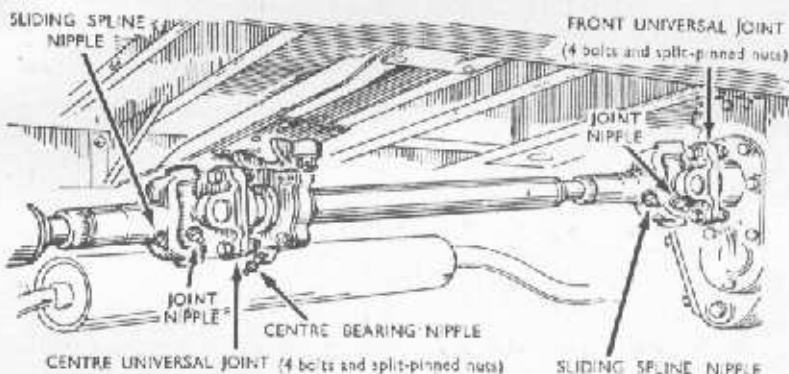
Propeller shaft and universal joint lubrication nipples (there is also a nipple at the rear axle end of the shaft). The centre bearing and universal joint are fitted to long wheelbase (Model OL) and Bus only.
